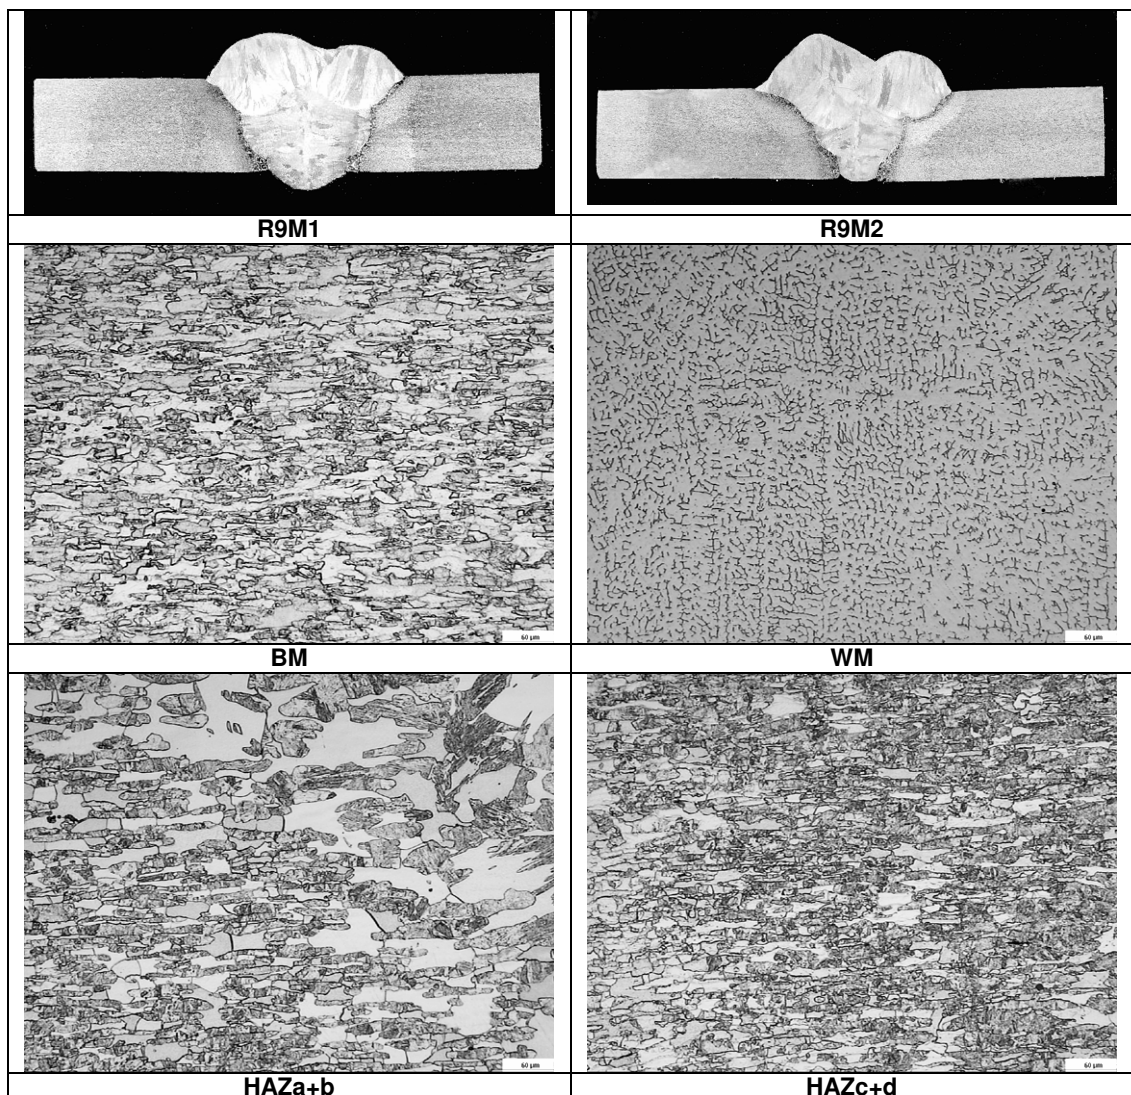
Macro and microphotographs of 6 mm thick GMAW weld (R9).
